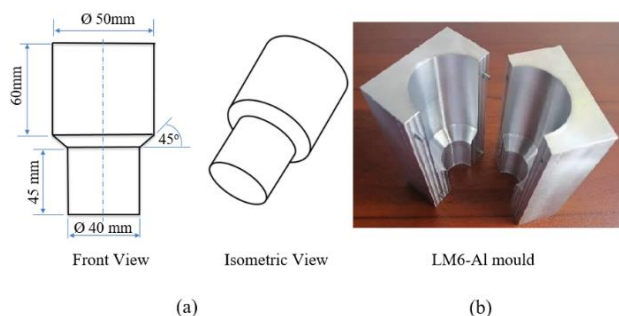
(a) Shape and dimensions of pattern and, (b) LM6- aluminium mould.
